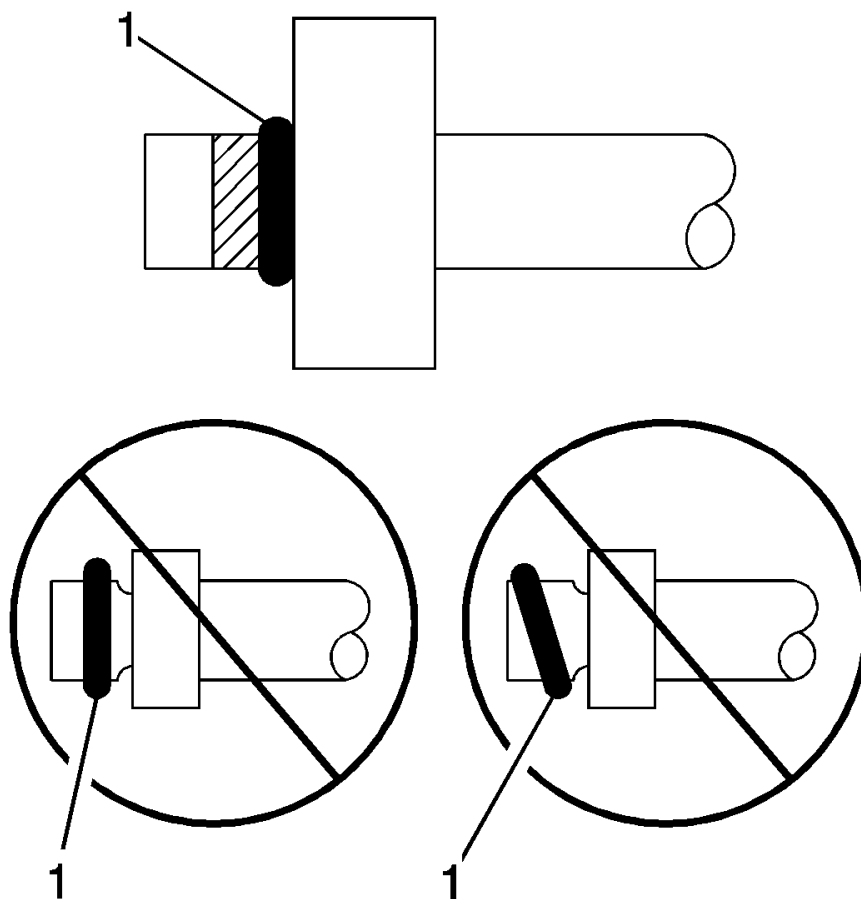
Identifying Good & Bad Sealing Washer Positions
